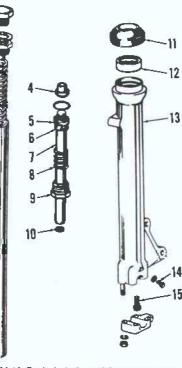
Exploded view of front suspension unit used on late models.
